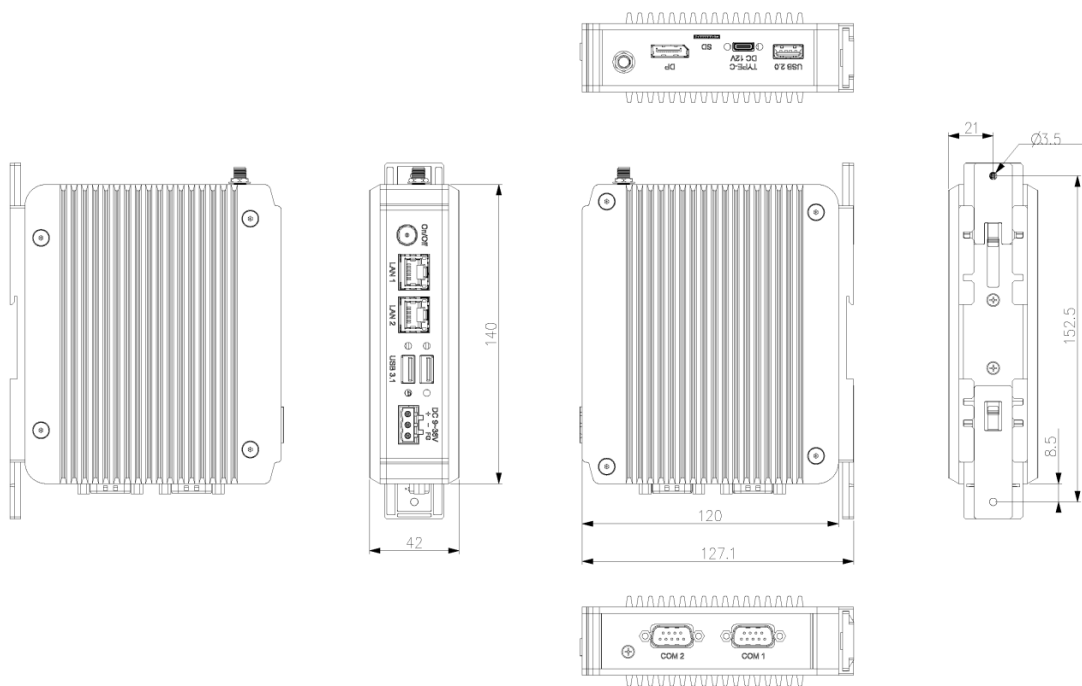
Din Rail Mount and Wall Mount of TITAN-300
